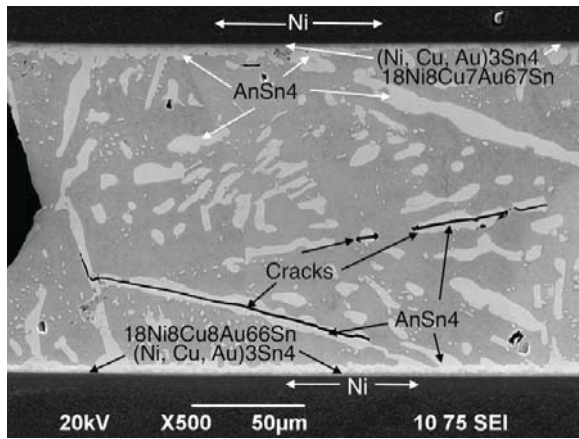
Fracture in AuSn₄ IMC in the bulk solder, a TOPS component on a thick Au board, after thermal aging for 30 days.
